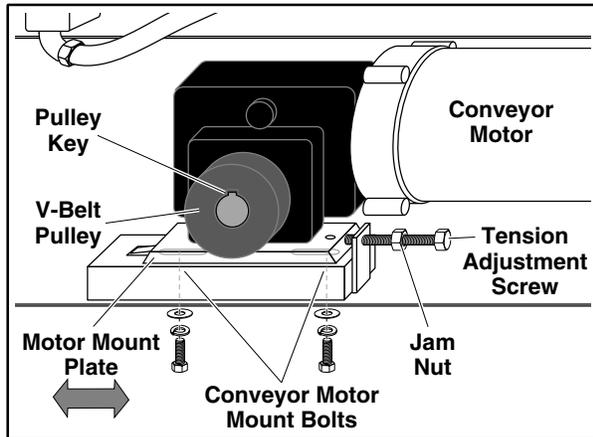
Conveyor Motor V-Belt Tension Adjustment
